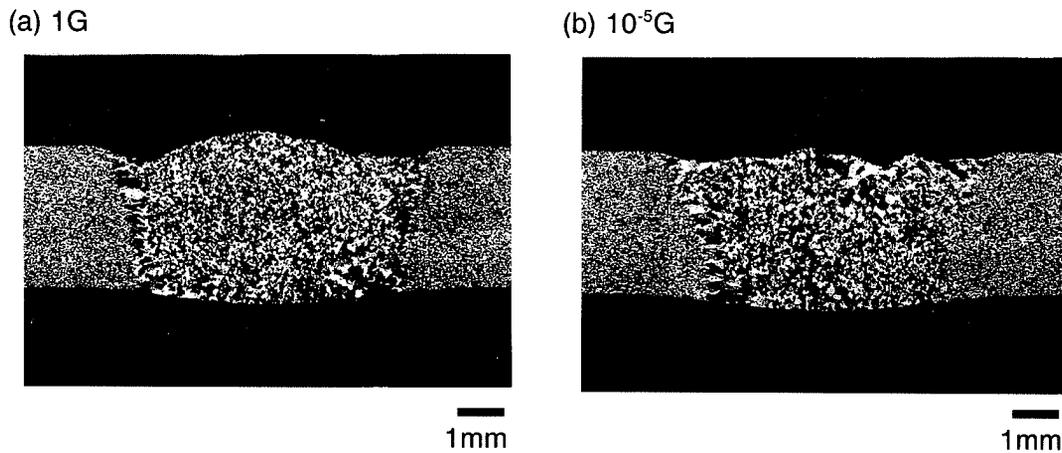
Transverse sections of bead-on-plate welds in vertical up welding with argon shielding gas.
